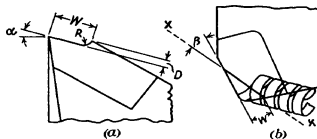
CORRECT CHIP BREAKER GROOVES
